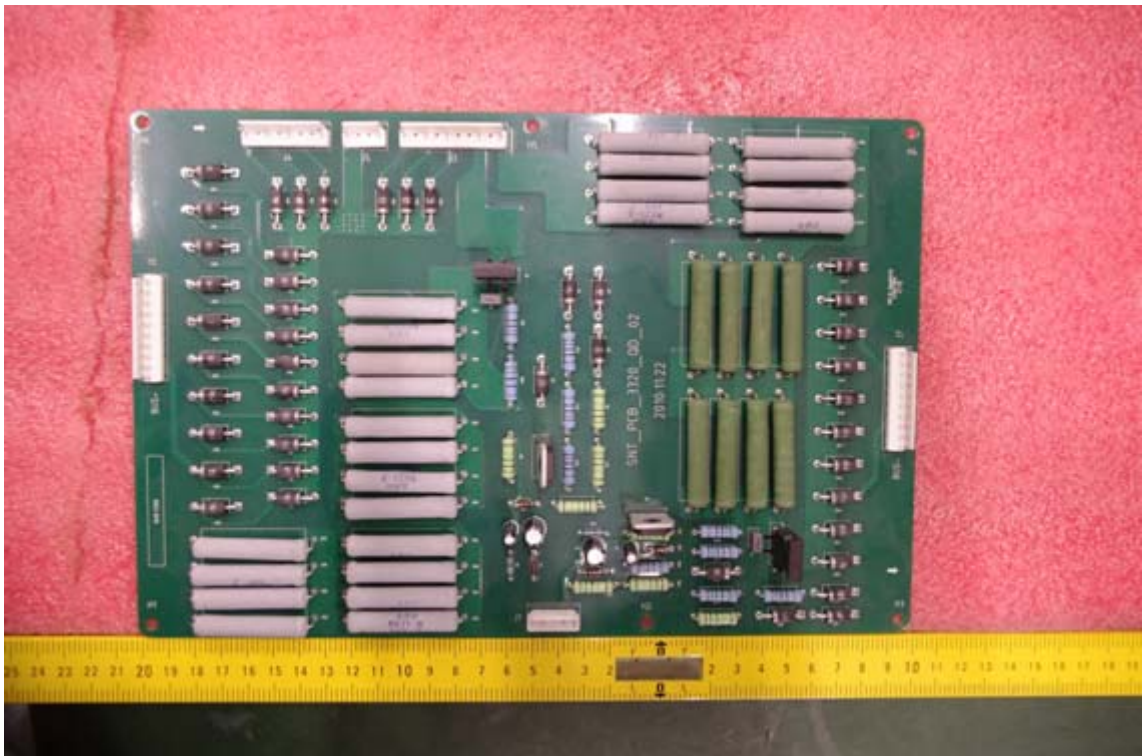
Board SNT\_PCB\_3320\_QD, component side view
